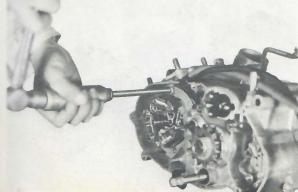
Unscrewing stator and neutral switch wire fitting screws with cross head screw driver
